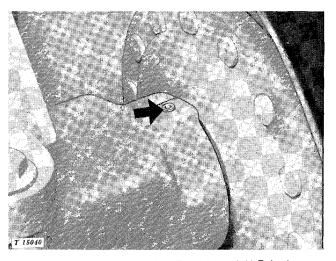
Axle Bearing Plug (Front Shown) (4 Points)
